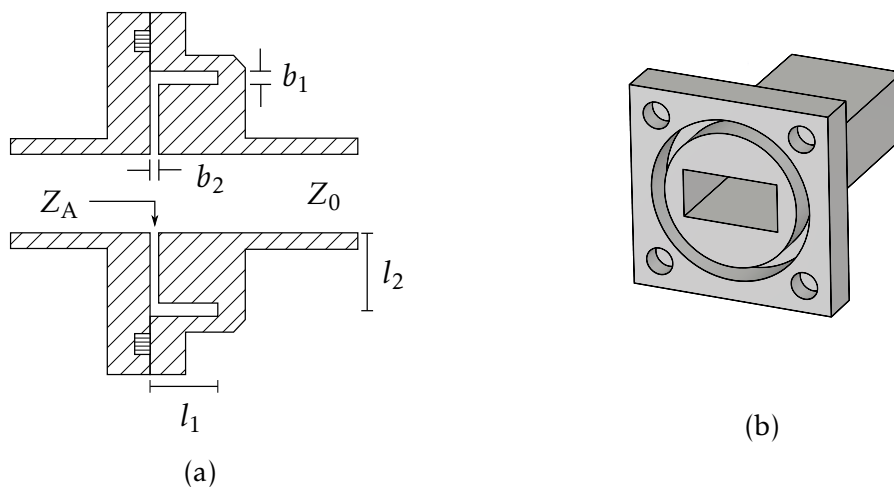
(a) Cross-sectional view of a conventional choke-flange coupling, (a) circular-groove choke flange.
